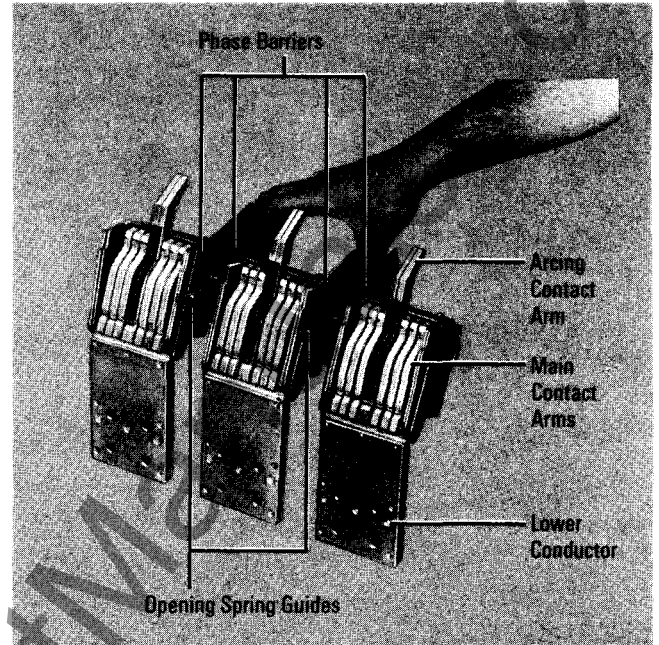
Underneath Side of SPB-65, 1600 Amp Moving Contact Arm Assembly.
